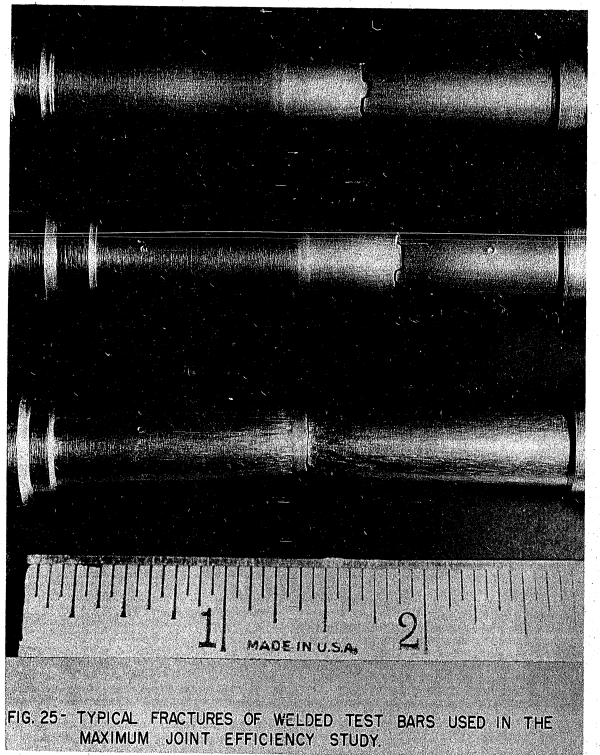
TYPICAL FRACTURES OF WELDED TEST BARS USED IN THE MAXIMUM JOINT EFFICIENCY STUDY.
